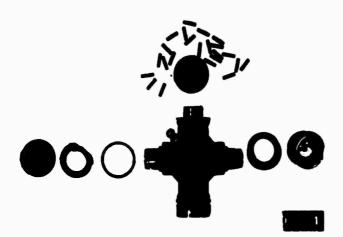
Left Rear-Wheel Drive-Shaft Inboard Universal Joint (Experimental) Broken Races On M151A1C after 2147 Test Miles.
